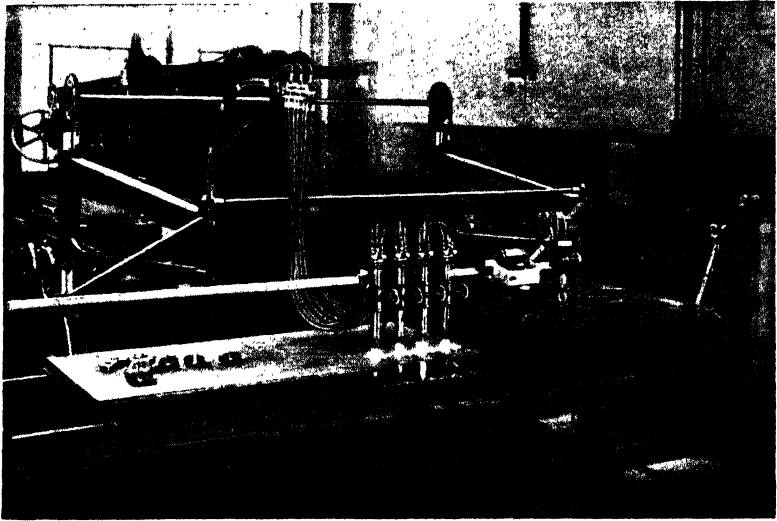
XIV.—Multiple automatic machine for gas cutting. (*Courtesy of the Air Reduction Sales Company, Inc.*)
